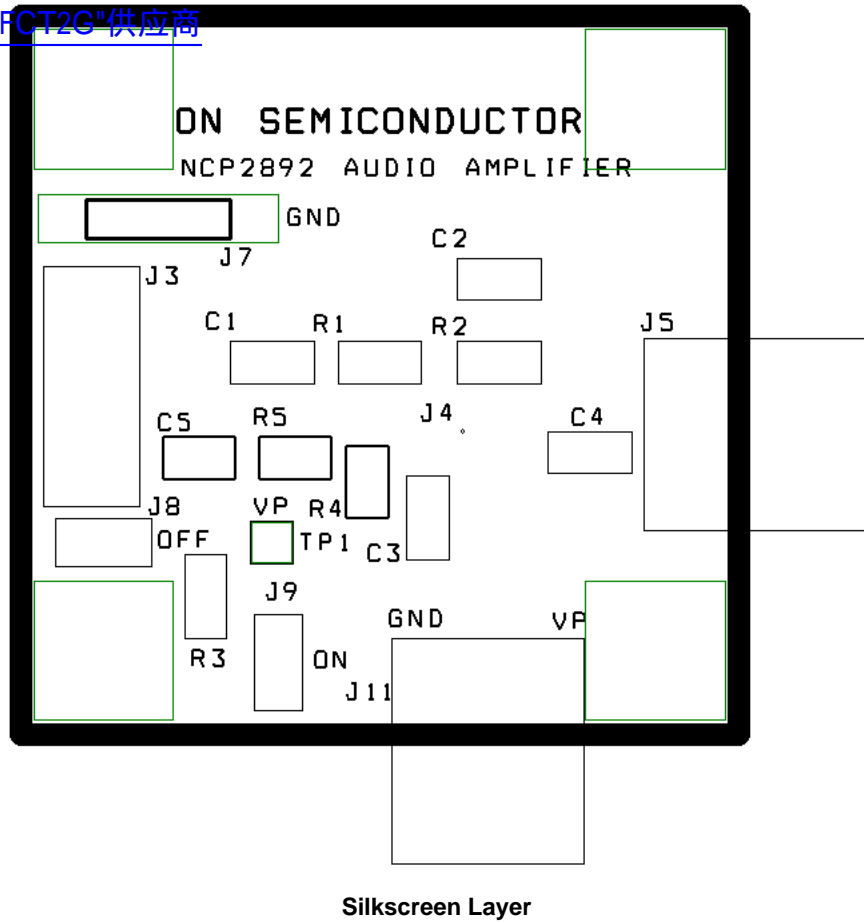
Demonstration Board for 9-Pin Flip-Chip CSP Device – PCB Layers
